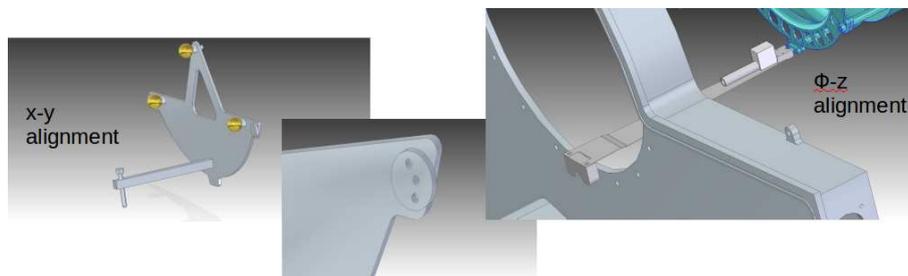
Technical drawing of the MICE Tracker alignment jig; showing the semicircular section for rotational (theta) alignment (far left); the shaft for positioning in  $z$  (far right) which determines how far into the bore the Tracker is inserted; and the mount for the survey balls (centre).
